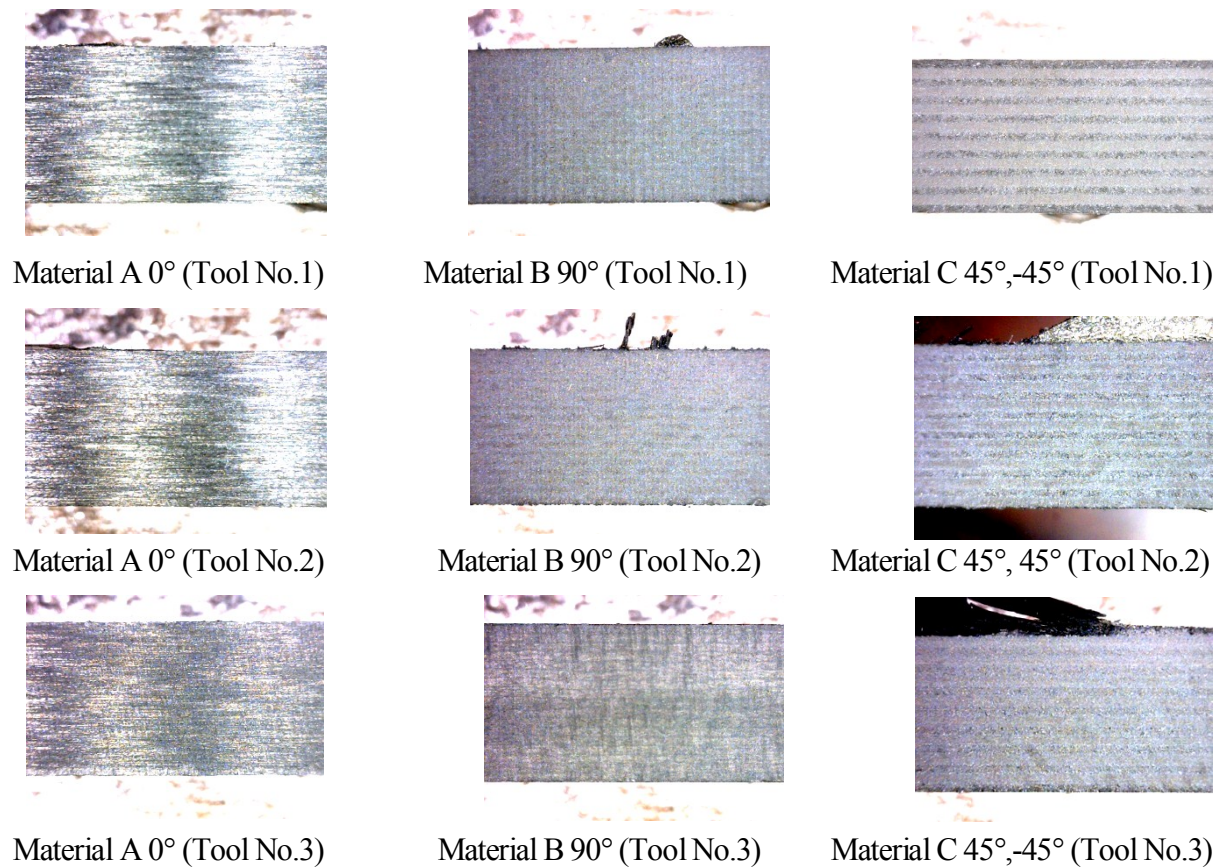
Finish surface conditions (Up cut method) (Tool No. 1: Helix angle 0°, Tool No. 2: Helix angle 30°, Tool No. 3: Helix angle 45°)
